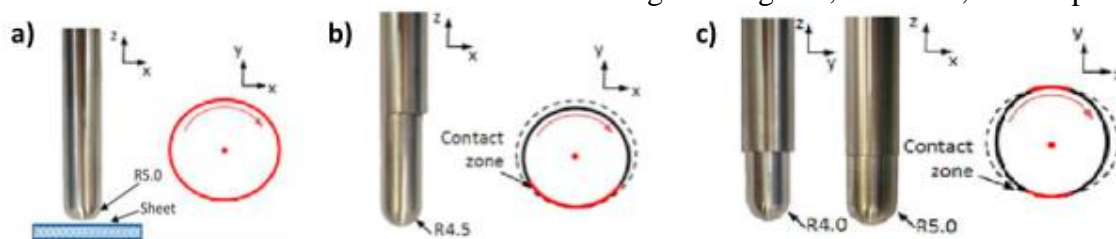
Three types of forming tools used: a) conventional hemispheric tool, b) single-offset tool and c) dual-offset tool²⁷
